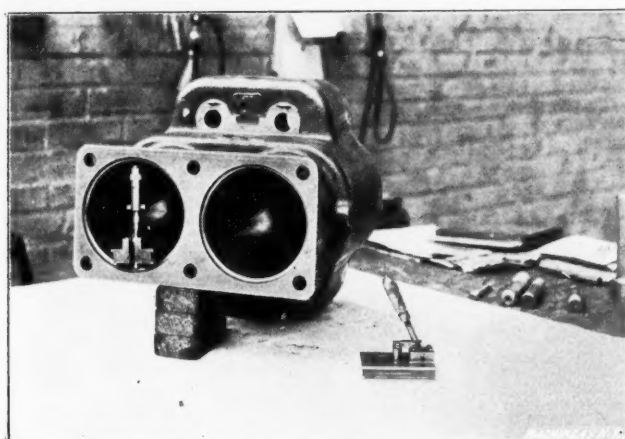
Micrometer Gage for Testing the Size, Roundness and Parallelism of the Cylinder Bores
